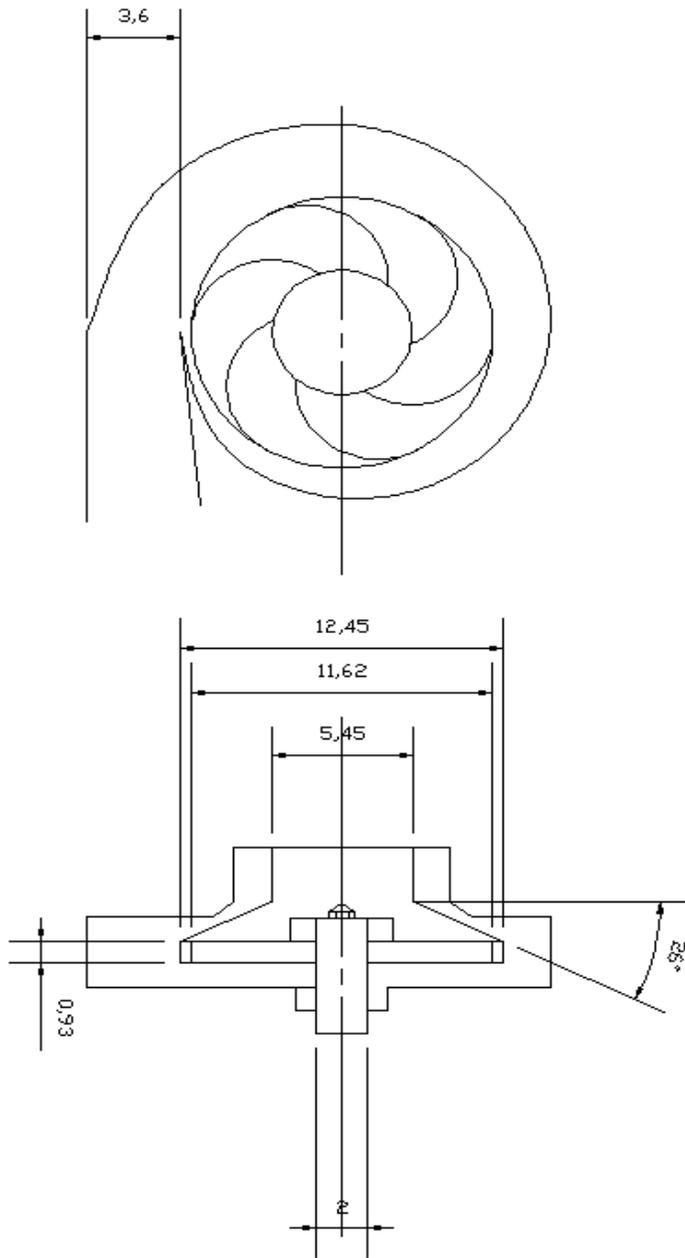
Assembly Drawing of the Centrifugal Pump
